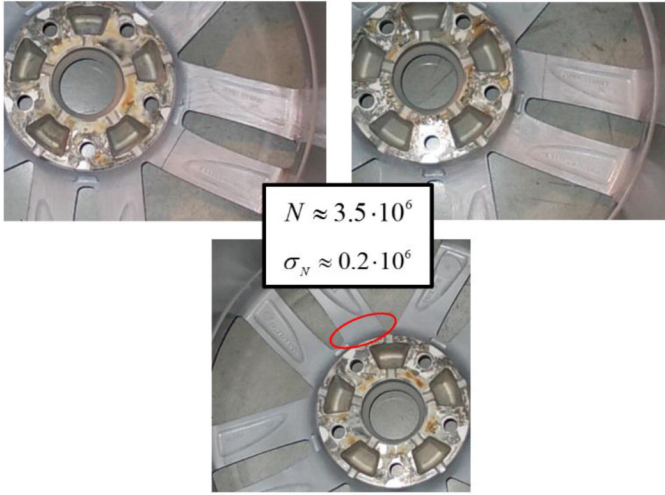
Cracks after a rotary bending fatigue test on three different wheels.
